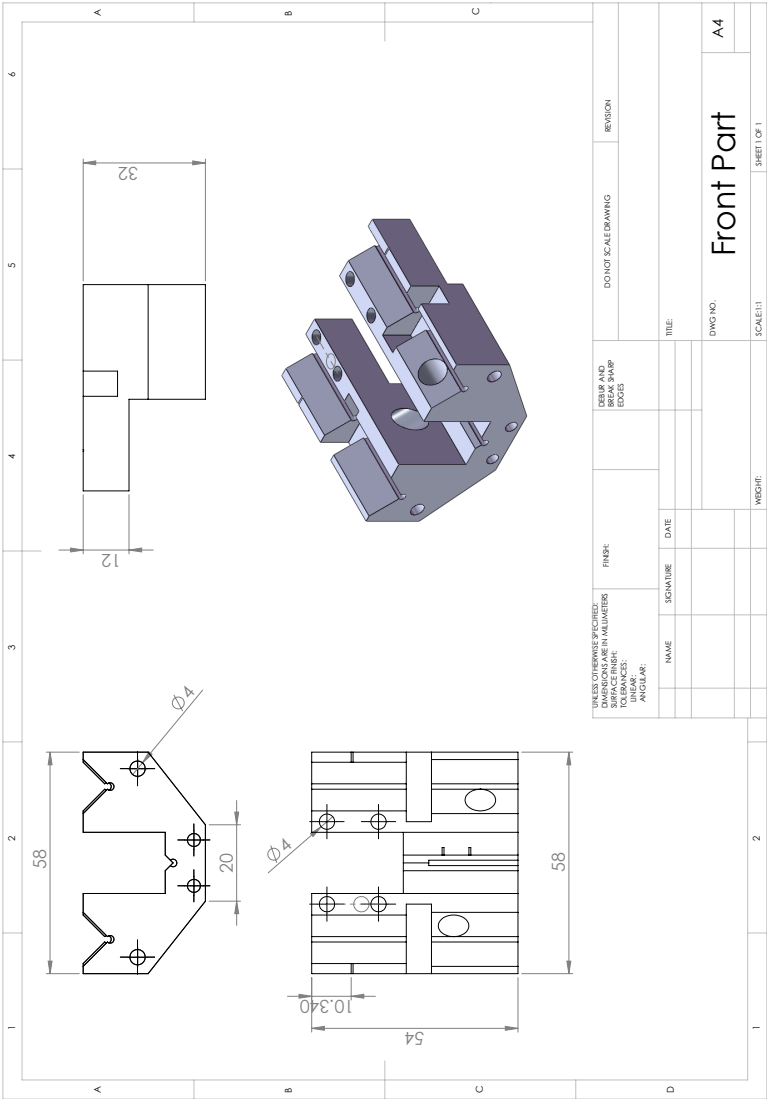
CAD drawing of front piece housing two 45° beam splitters and cat's eyes.
